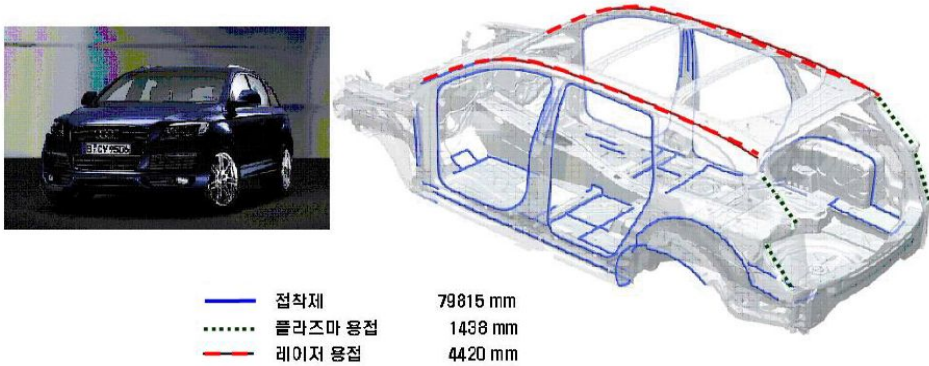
Application LASER welding in Audi Q7
